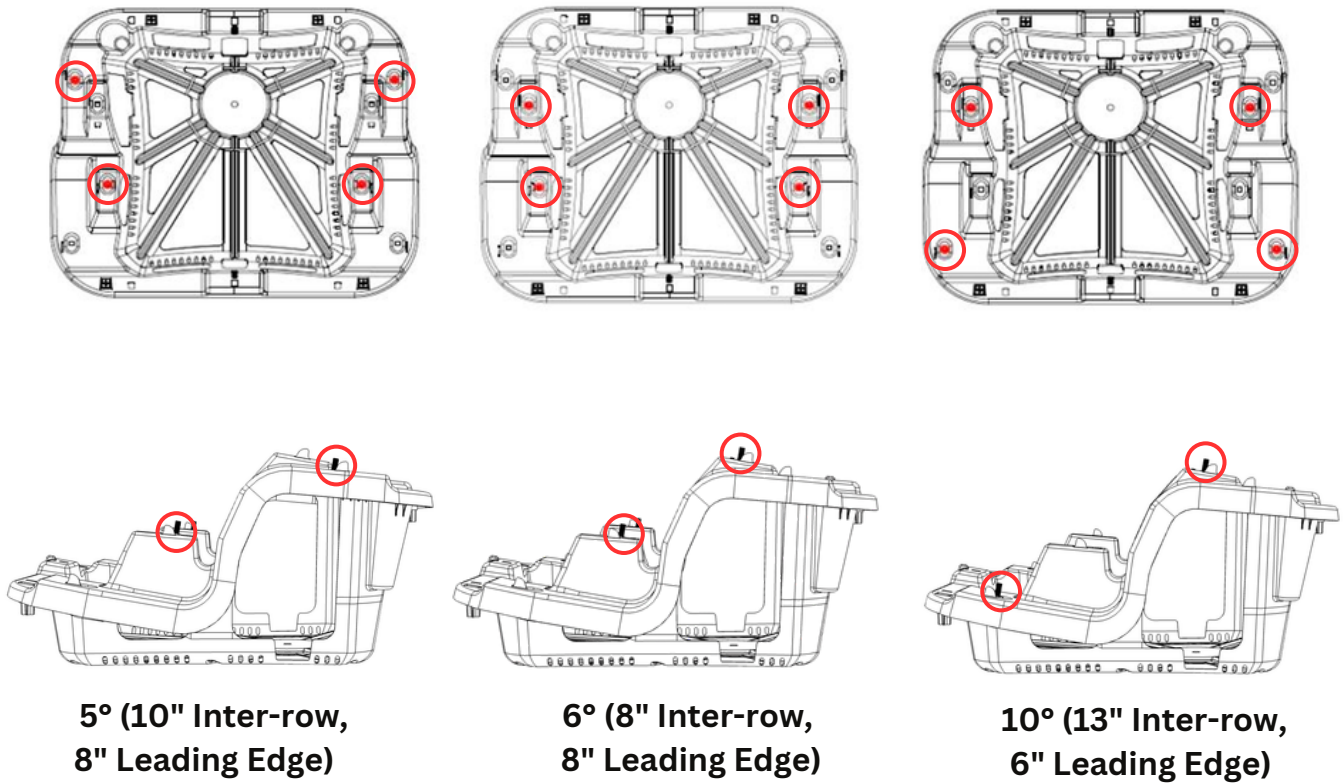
FR510-6 Pre-Installed Bolt Locations
